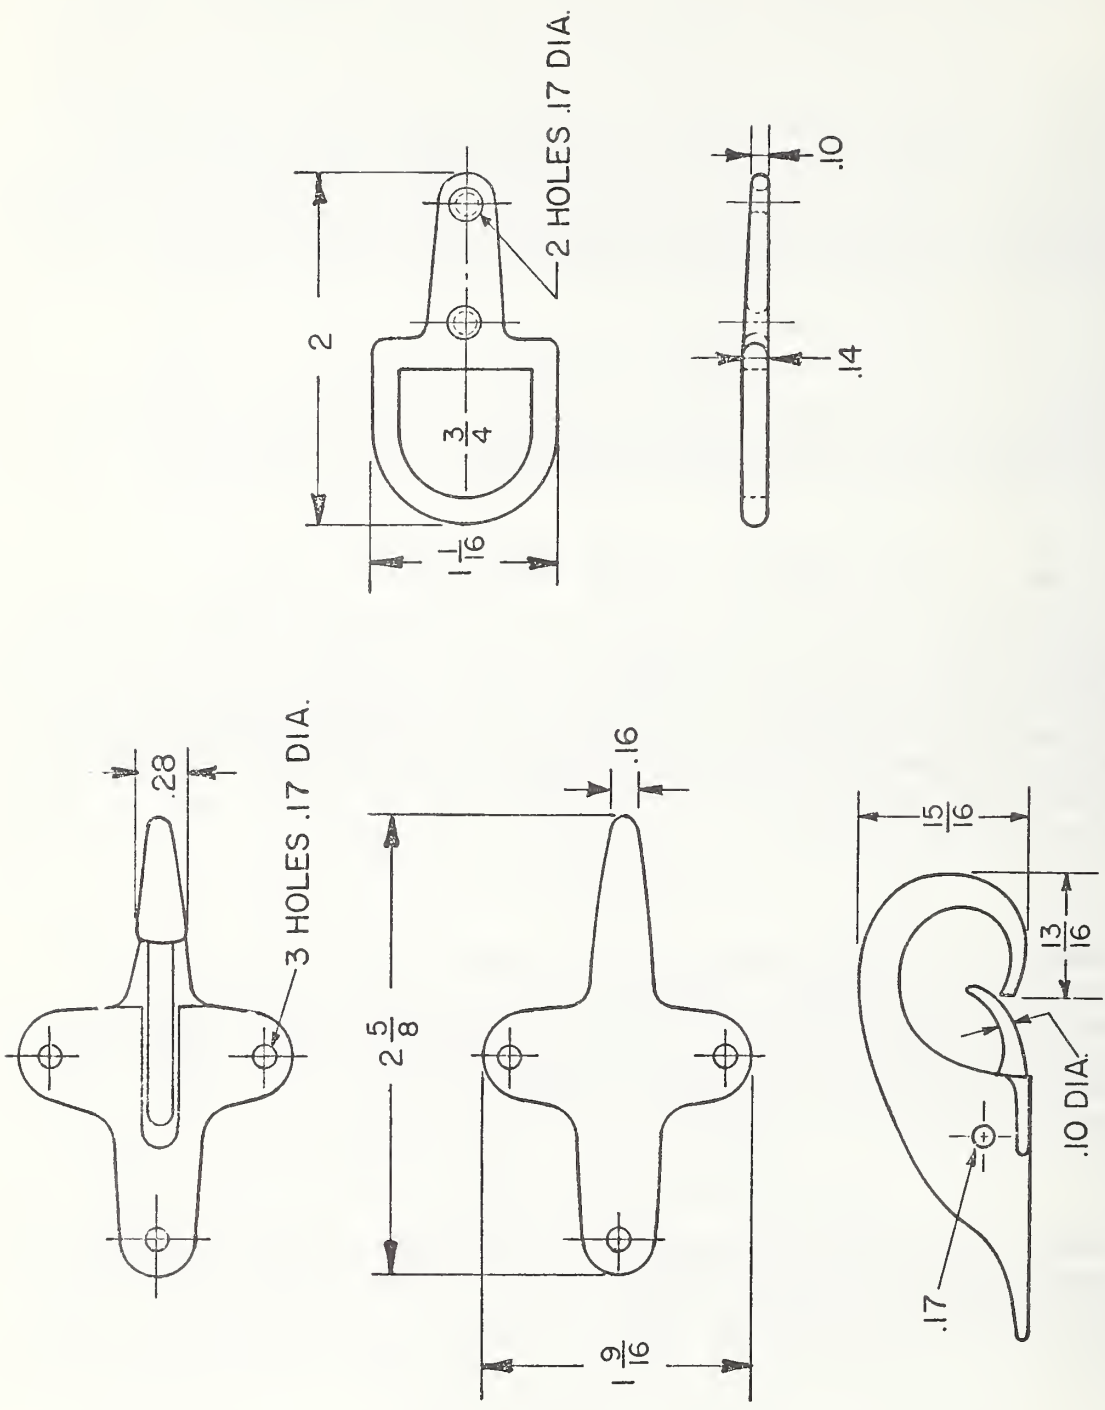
"Hook and dee ring (inward facing)" (all dimensions in inches).
